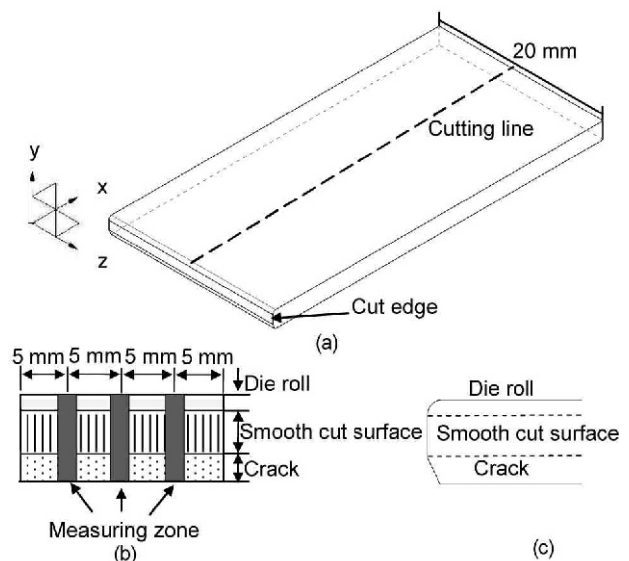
Illustration of dimension measurements: (a) Cut part; (b) front view (plane yz); (c) cross section (plane xy).
